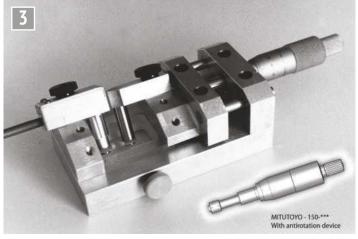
Compared with the larger version, a smaller barrel micrometer head (ref 4) was easier to twirl between finger and thumb. I have difficulty in recalling whether this smaller micrometer head had a nonrotating spindle or had the same 'slip ring' anti-rotation device as shown on the larger
